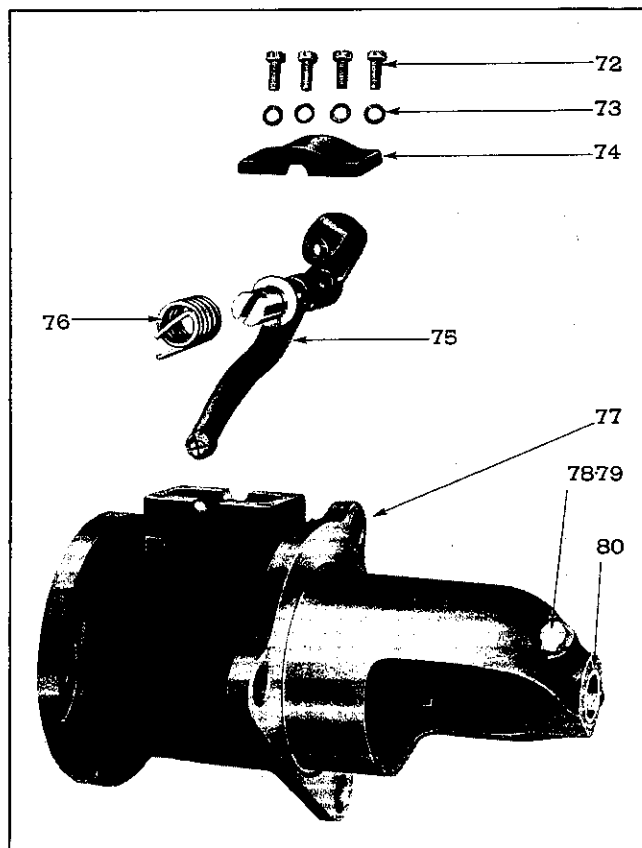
Motor Drive Housing Details and Relative Location of Parts.
